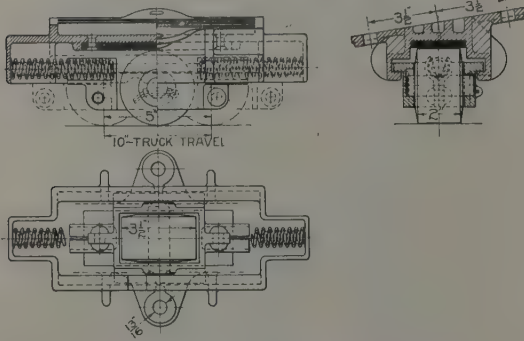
Drexel Single Roller Side Bearing for Freight Service.
